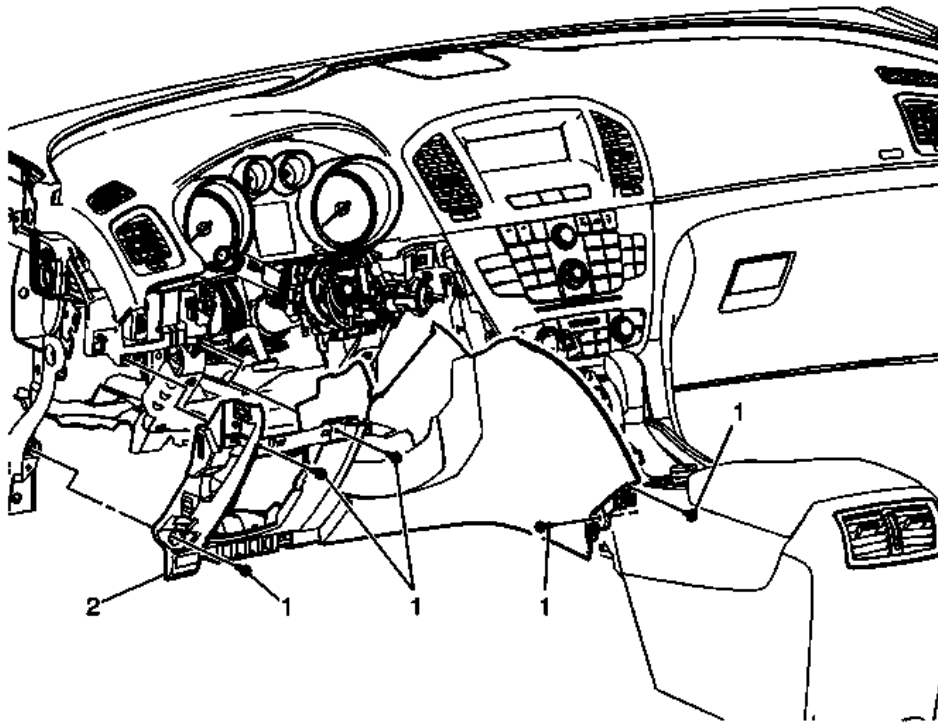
Instrument Panel Lower Trim Panel - Left Side
